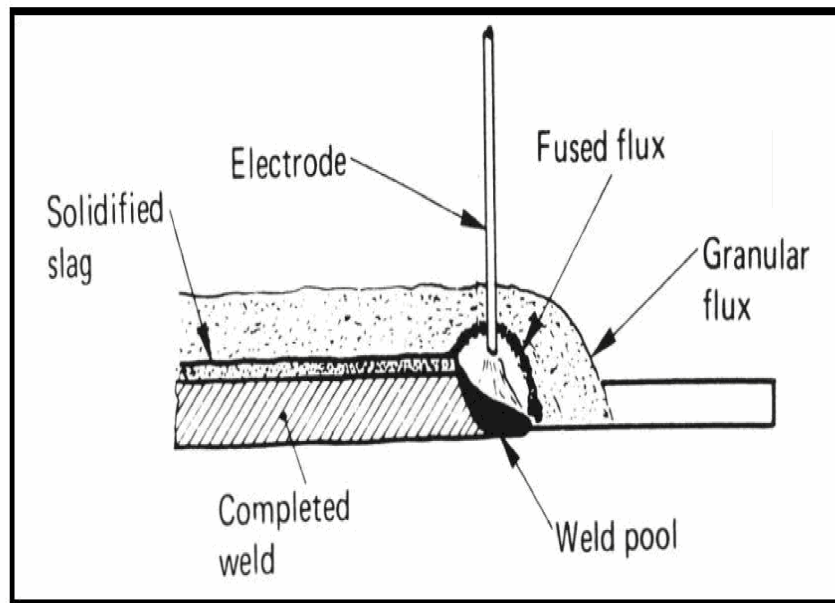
Illustration of Submerged Arc Welding [57].
